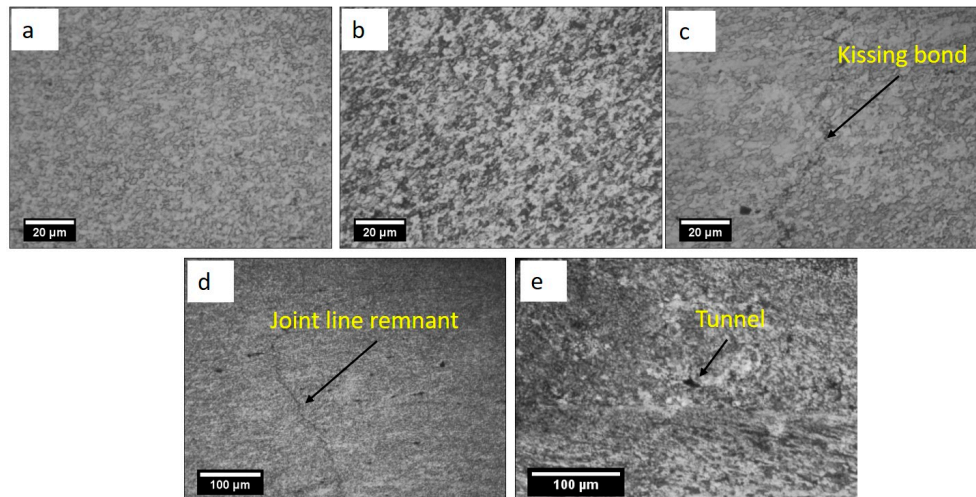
Butt joint micrographs obtained for specimen produced by using tools of (a) cylindrical pin; (b) tapered cylindrical pin; (c) square pin; (d) hexagonal pin; (e) triangular pin.
